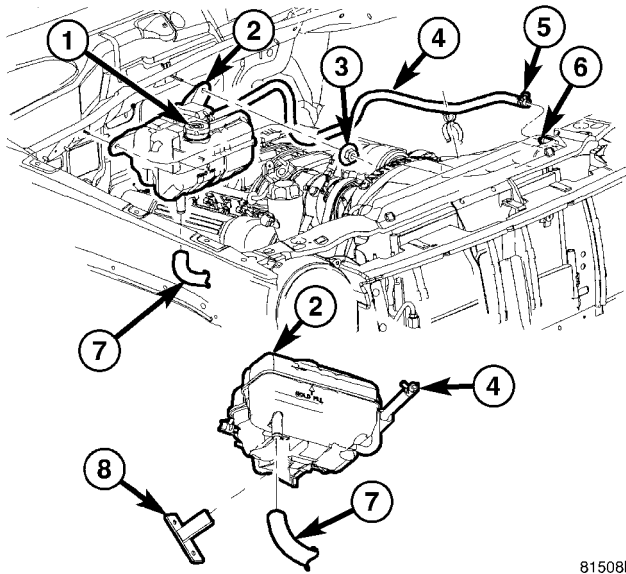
COOLANT BOTTLE - PRESSURE SYSTEM
